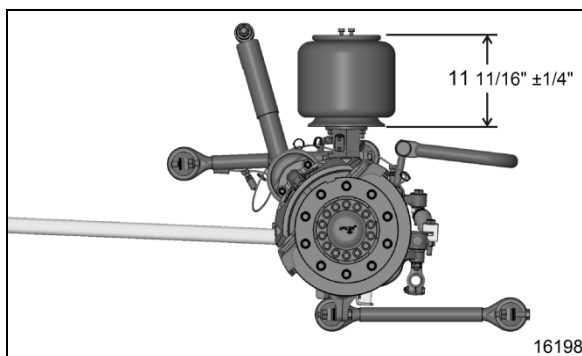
FRONT I-BEAM AXLE AIR SPRING CLEARANCE
